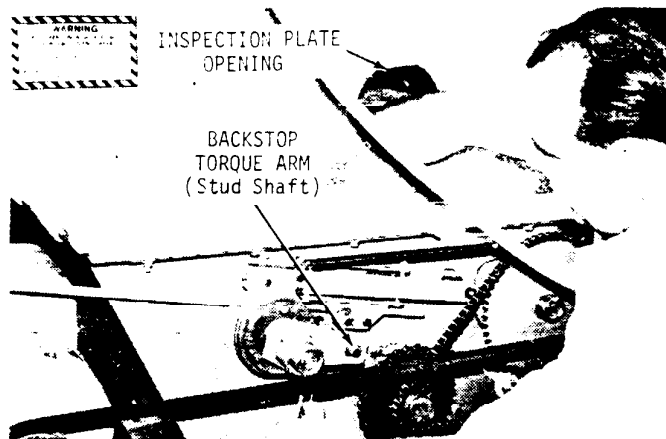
REMOVING THE BACKSTOP TORQUE ARM
